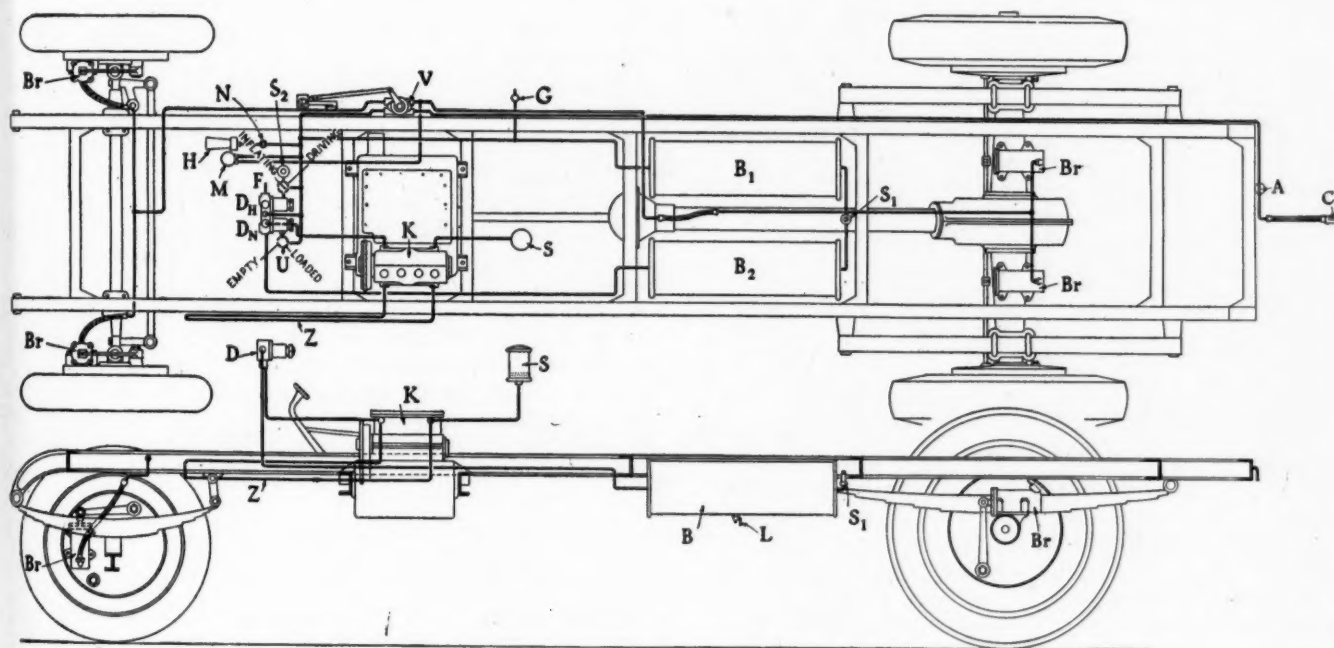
Schematic drawing of chassis with Knorr air brake on four wheels
